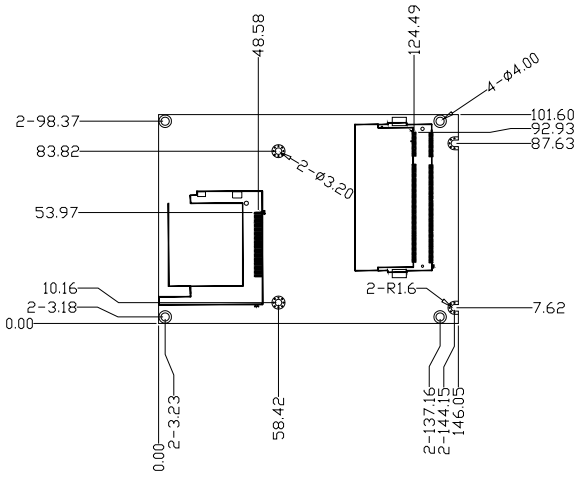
PCM-9375 Mechanical Drawing (Solder Side)
